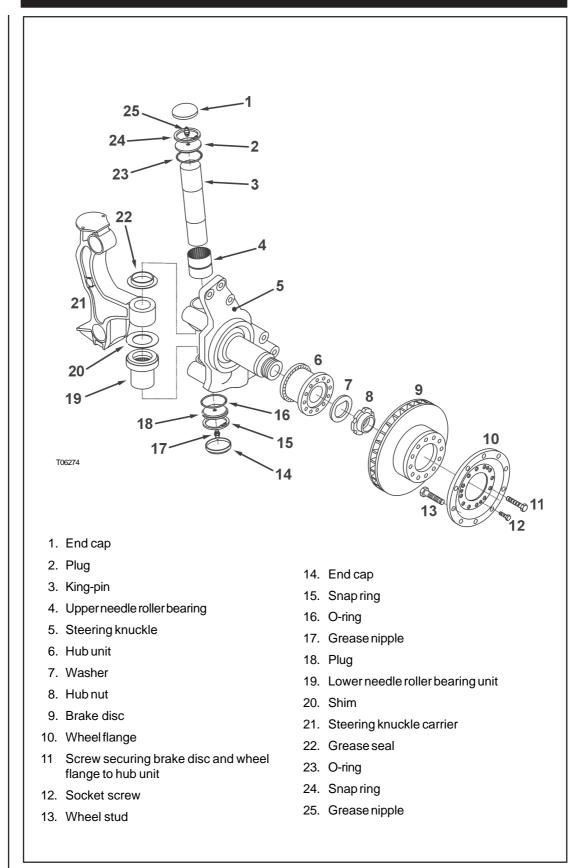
Exploded view, front axle end with "non maintenance-free" steering knuckle bearings
